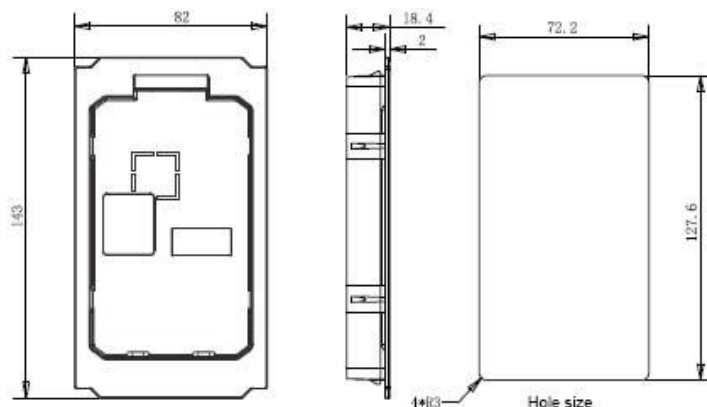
Keyboard Box Outline and Mounting Dimensions
